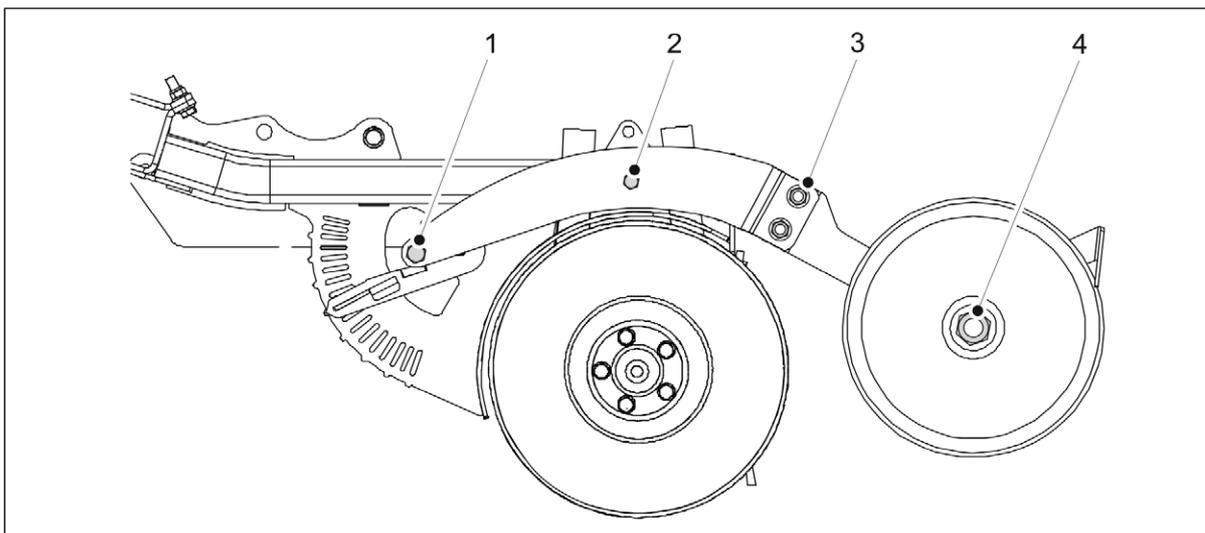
176. Bolts of the coulters covering wheel and depth adjustment
